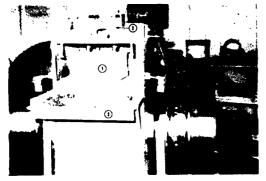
Melting and Casting Furnace with Mold in Prepouring Position.
